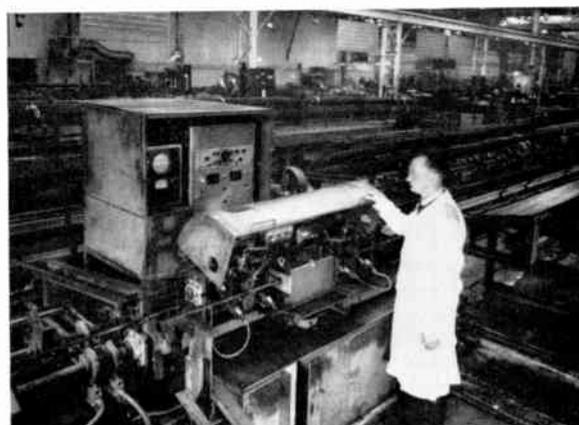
Fully automatic equipment testing mild steel tubes with d.c. saturation.
